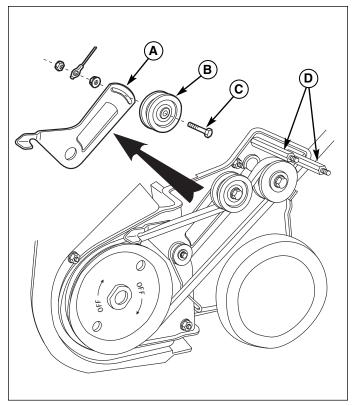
Auger Drive Belt Idler Pulley Adjustment
